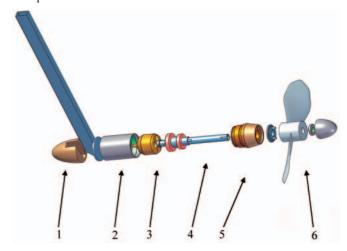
The simplified assembling drawing of the azimuthing propeller with the electric motor placed in the pod; 1 – fairwater, 2 – motor's seating, 3 – driving motor, 4 – stainless steel shaft with pair of bearings, 5 – second part of the propeller's pod with the seating of rolling bearings, 6 - propeller.
